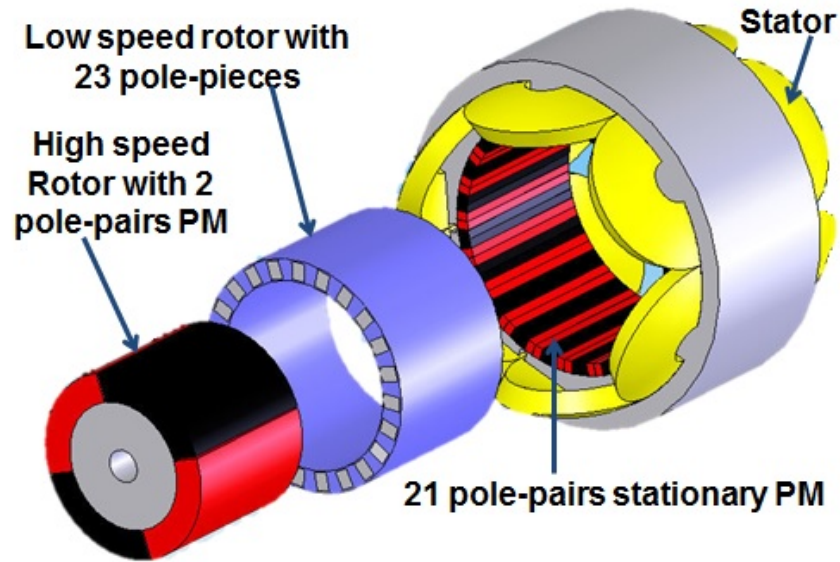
Magnetic gear and PM machine integration (PDD)
